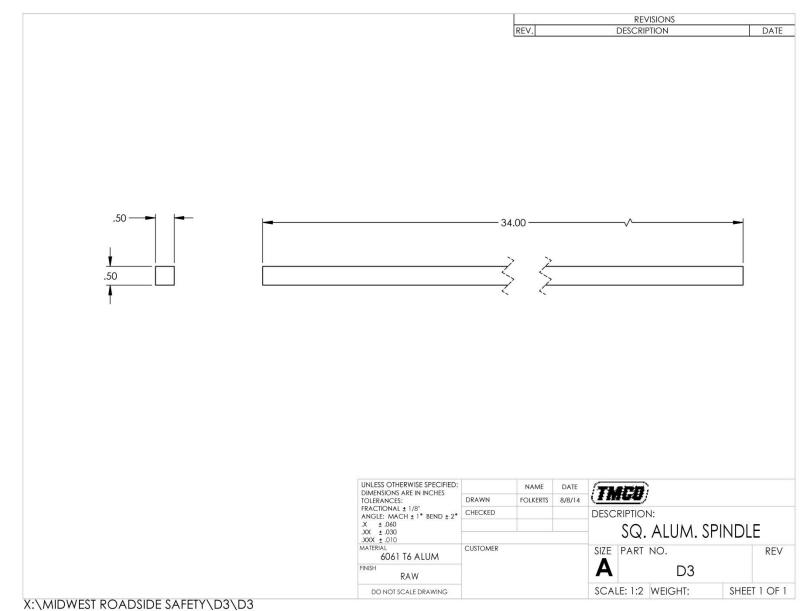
Fabrication Drawings, Test Nos. APR-1 and APR-2
